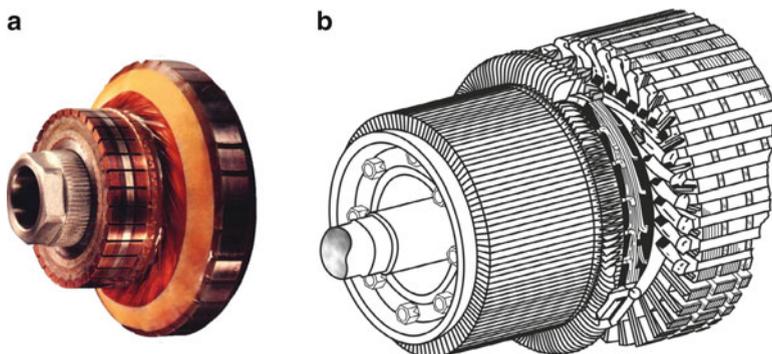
Appearance of the rotor of a DC machine. (a) Appearance of the collector. (b) Appearance of the magnetic and current circuits of a DC machine observed from collector side
